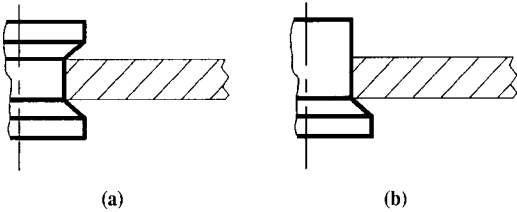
Schematic drawing of (a) grooved edger roll and (b) flat edger roll
